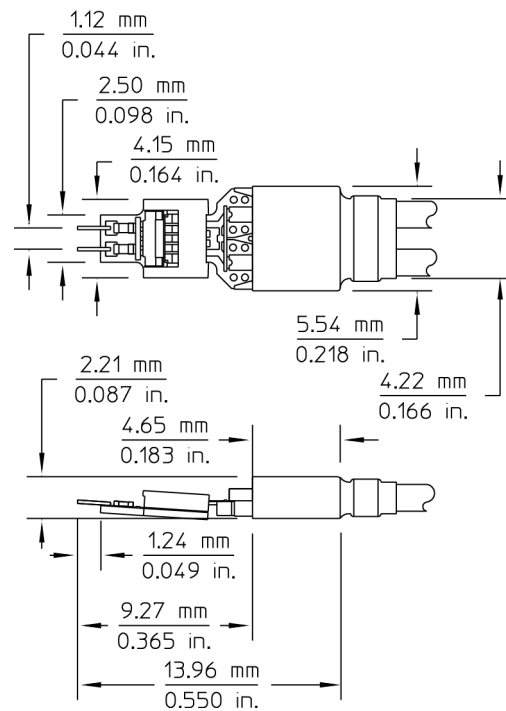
N5425B ZIF Probe Head Dimensions with N5426A ZIF Tip Attached
